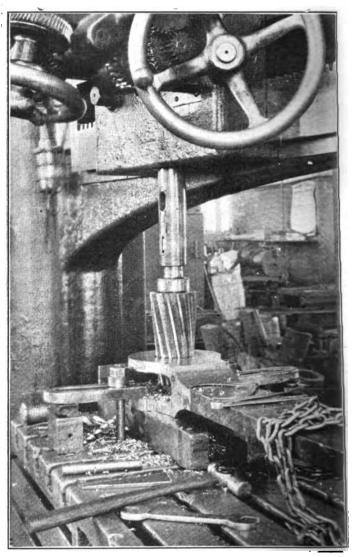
Reaming Side Rod Knuckle Pin Hole
